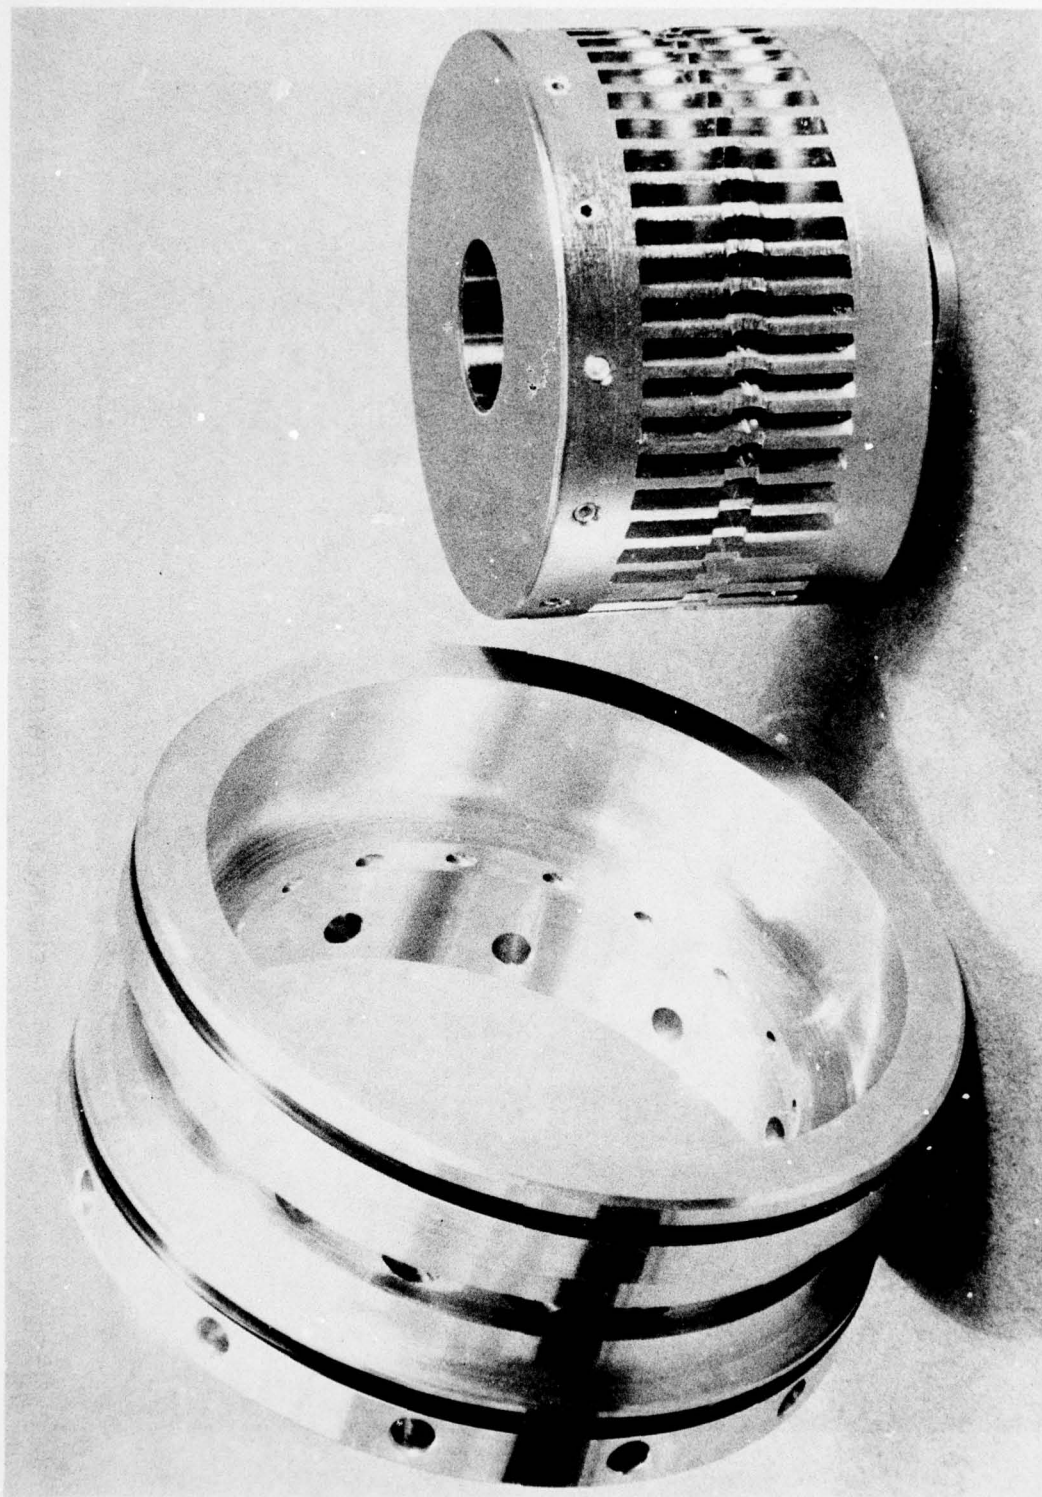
VIEW OF NOZZLE RING AND TURBINE
